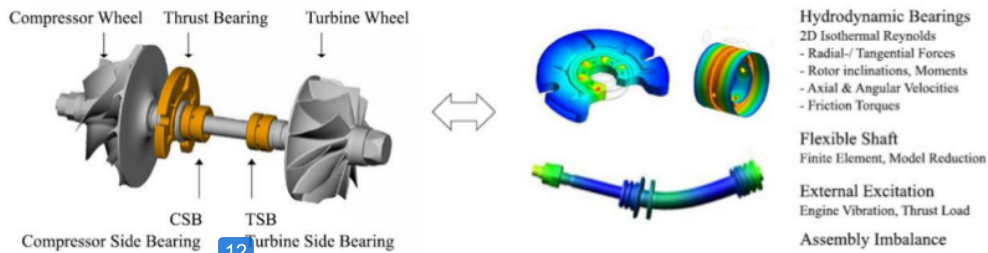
Radial compressor and turbine assembly modeling with turbo-shaft and bearing [11]
